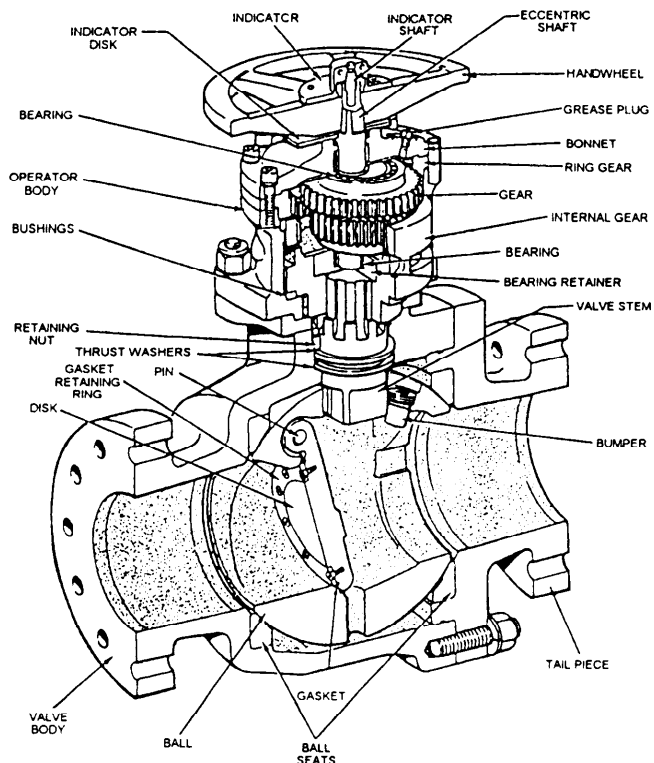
Typical ball stop swing-check valve for seawater service.
